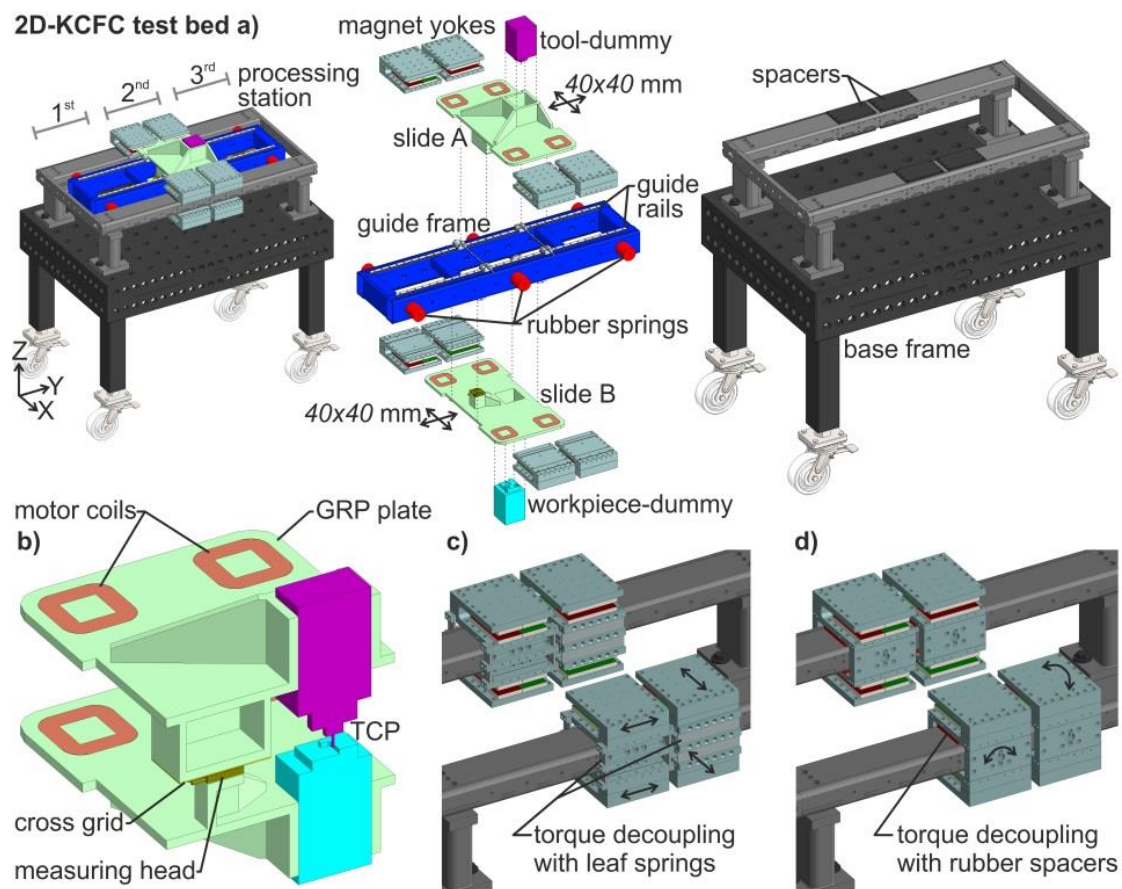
2D-KCFC test bed: a) overview of the components, b) detail of the slides, c), d) mechanical decoupling
